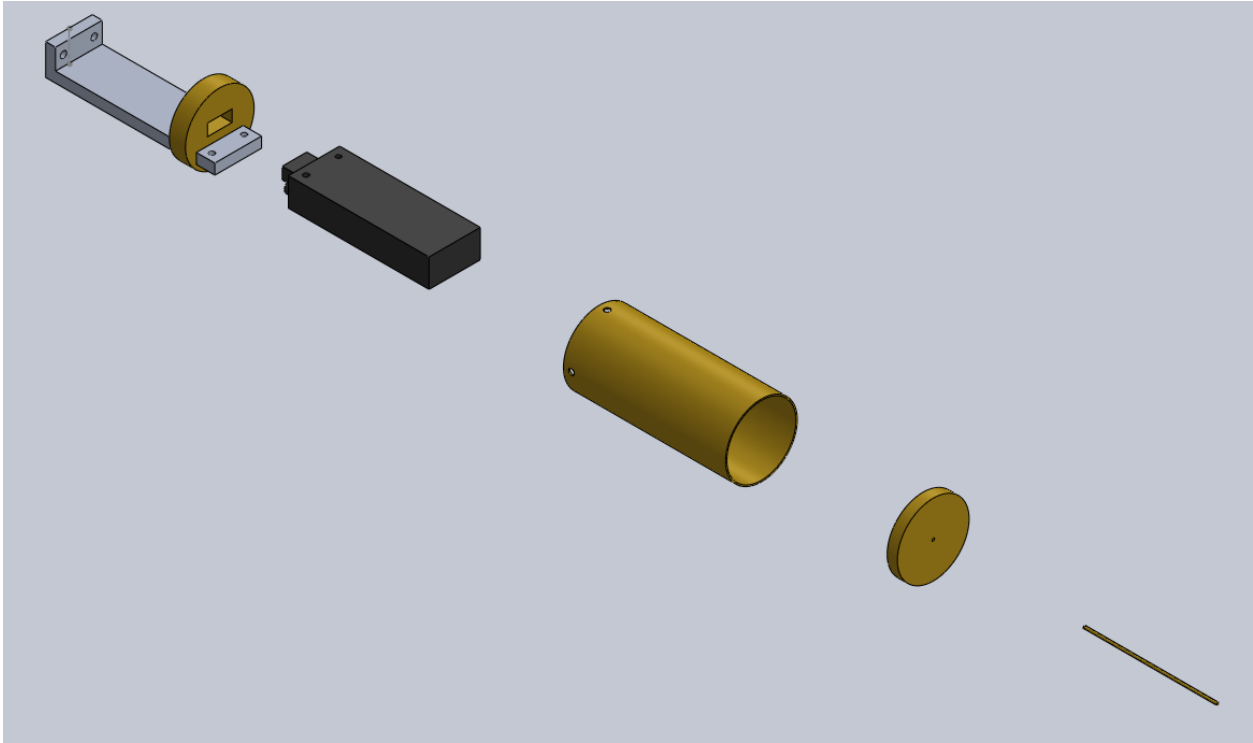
Exploded view of the modified FIG assembly CAD model. The black body represents the FIG.
